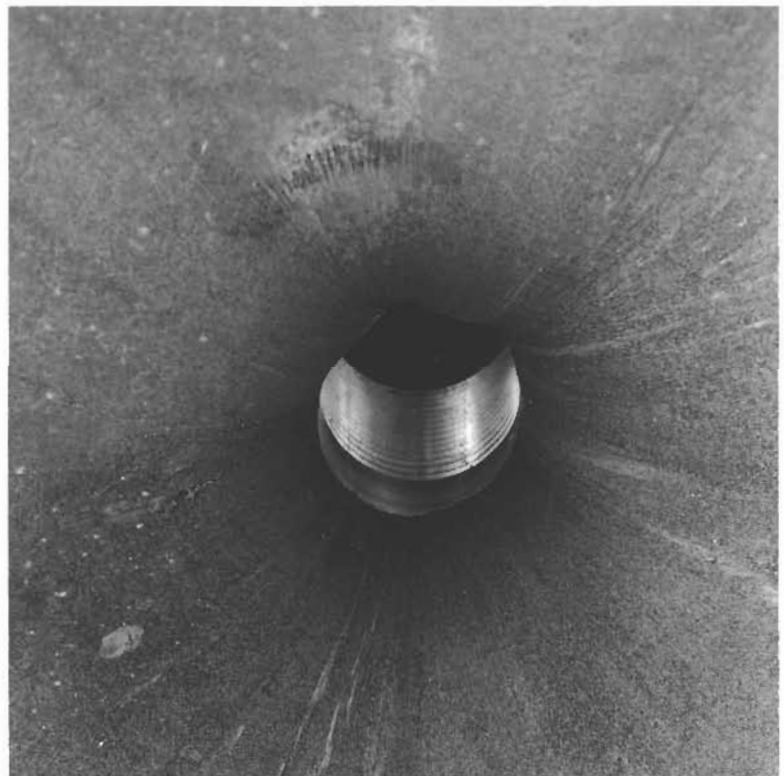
Inside view (looking from the inside towards the crown) of a fold near the threads.
